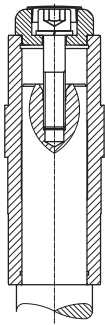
Gear unit mounted to shaft with a shoulder using the fastening element
